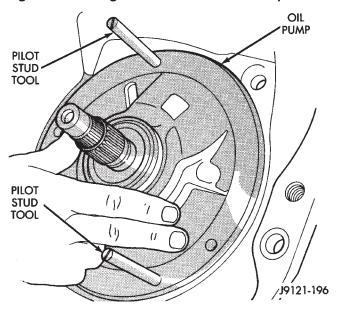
Installing Oil Pump And Reaction Shaft Support
